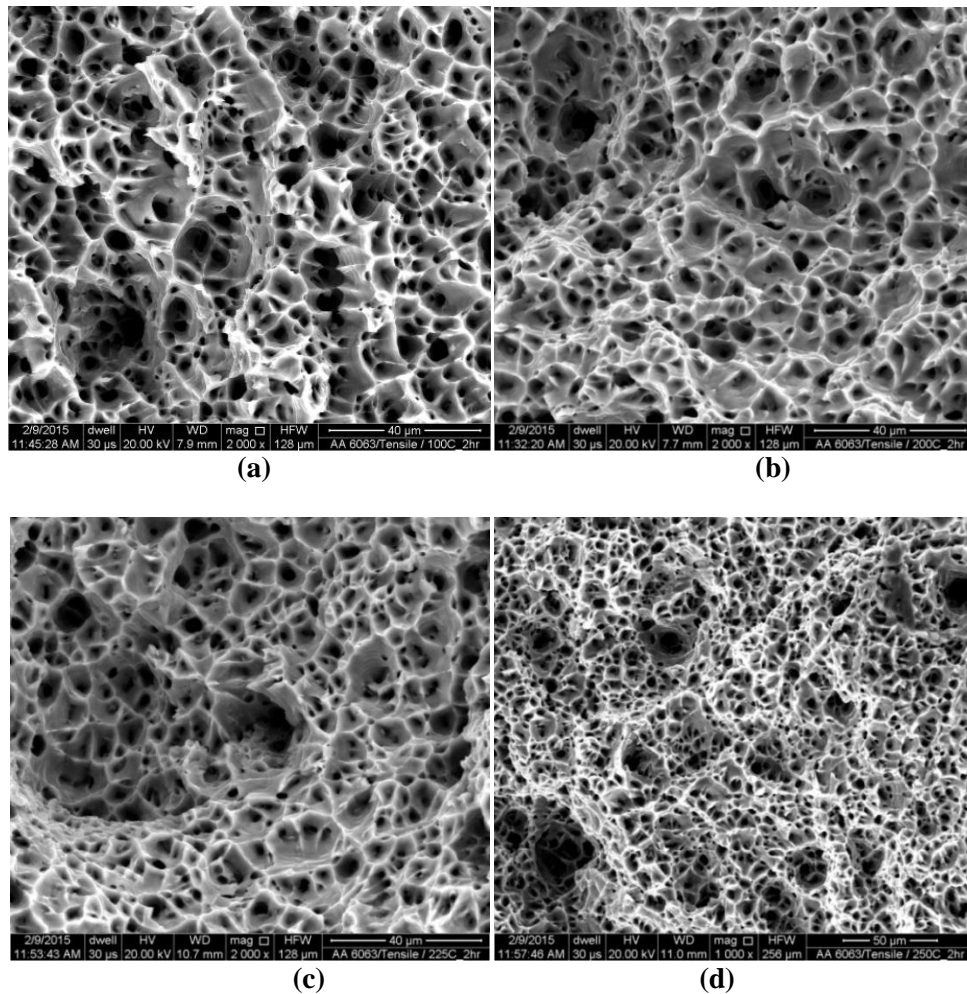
Honeycomb structure (dimples) on the surface of fractures of tensile specimens of AA6063 at :
